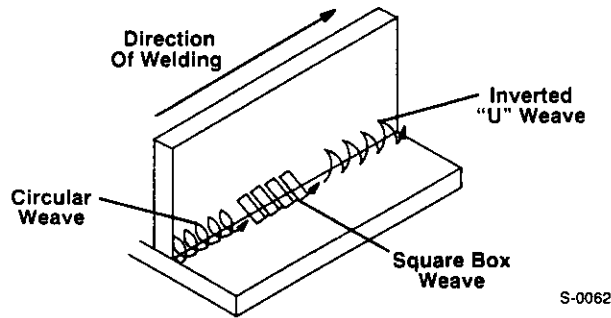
Tee Joint Fillet Weld
